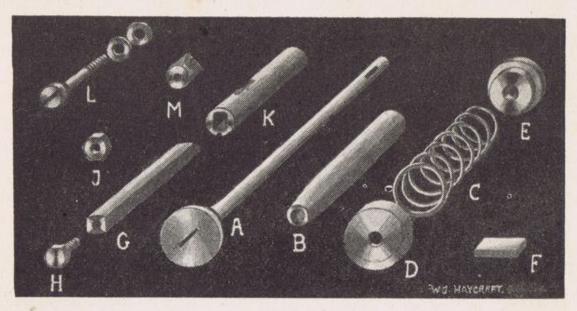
SHOWING SOME COMPONENTS OF THE VALVE GEAR DISMANTLED
